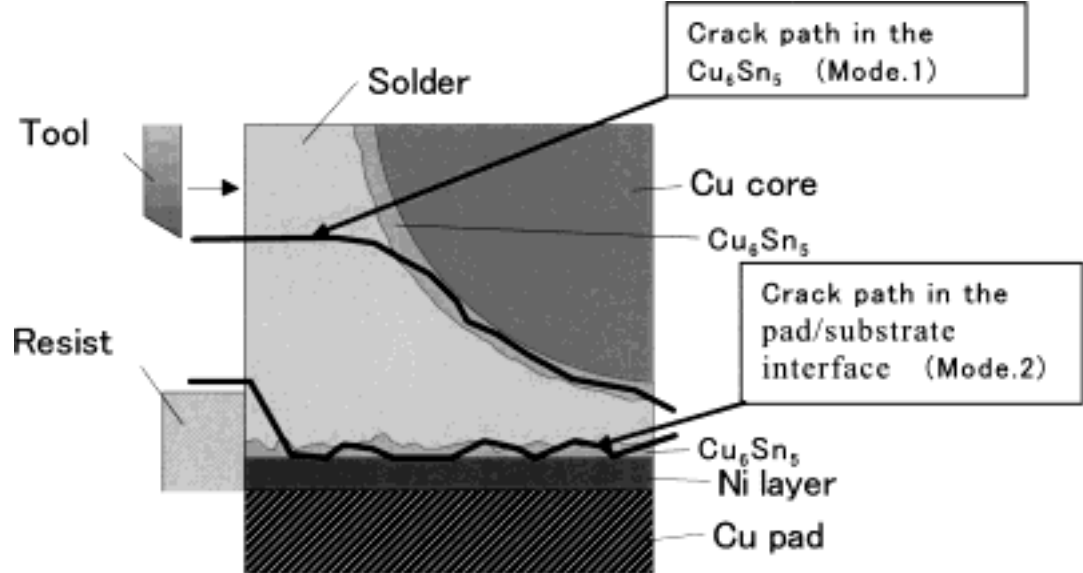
Schematic illustration of crack paths showing shear test for BGA joints. Mode 1 refers to fractures in the  $\text{Cu}_6\text{Sn}_5$  reaction layer formed between Cu ball and solder. Mode 2 refers to fractures at the solder/Ni interface.
